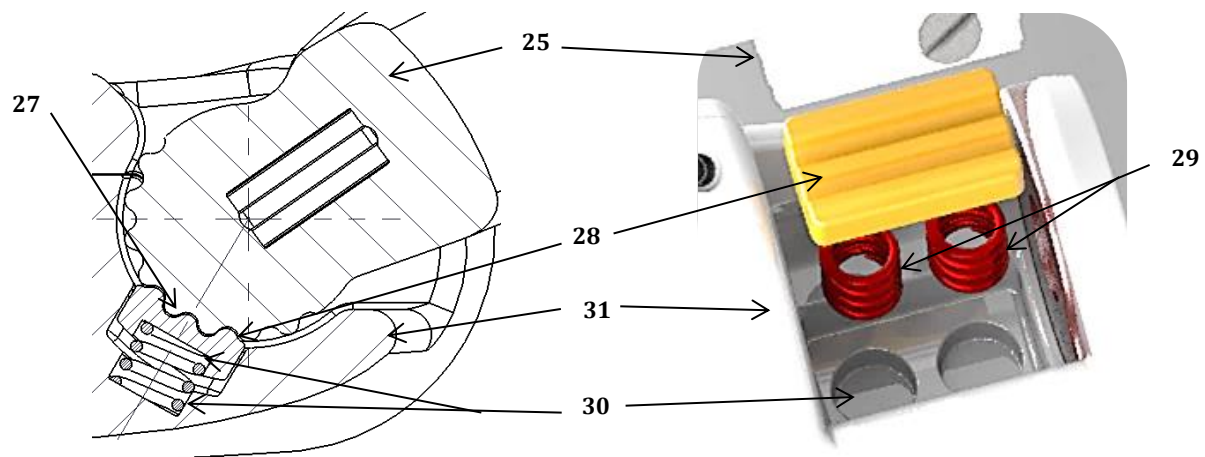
Transverse section view and exploded perspective view of the incremental locking mechanism of the thumb
